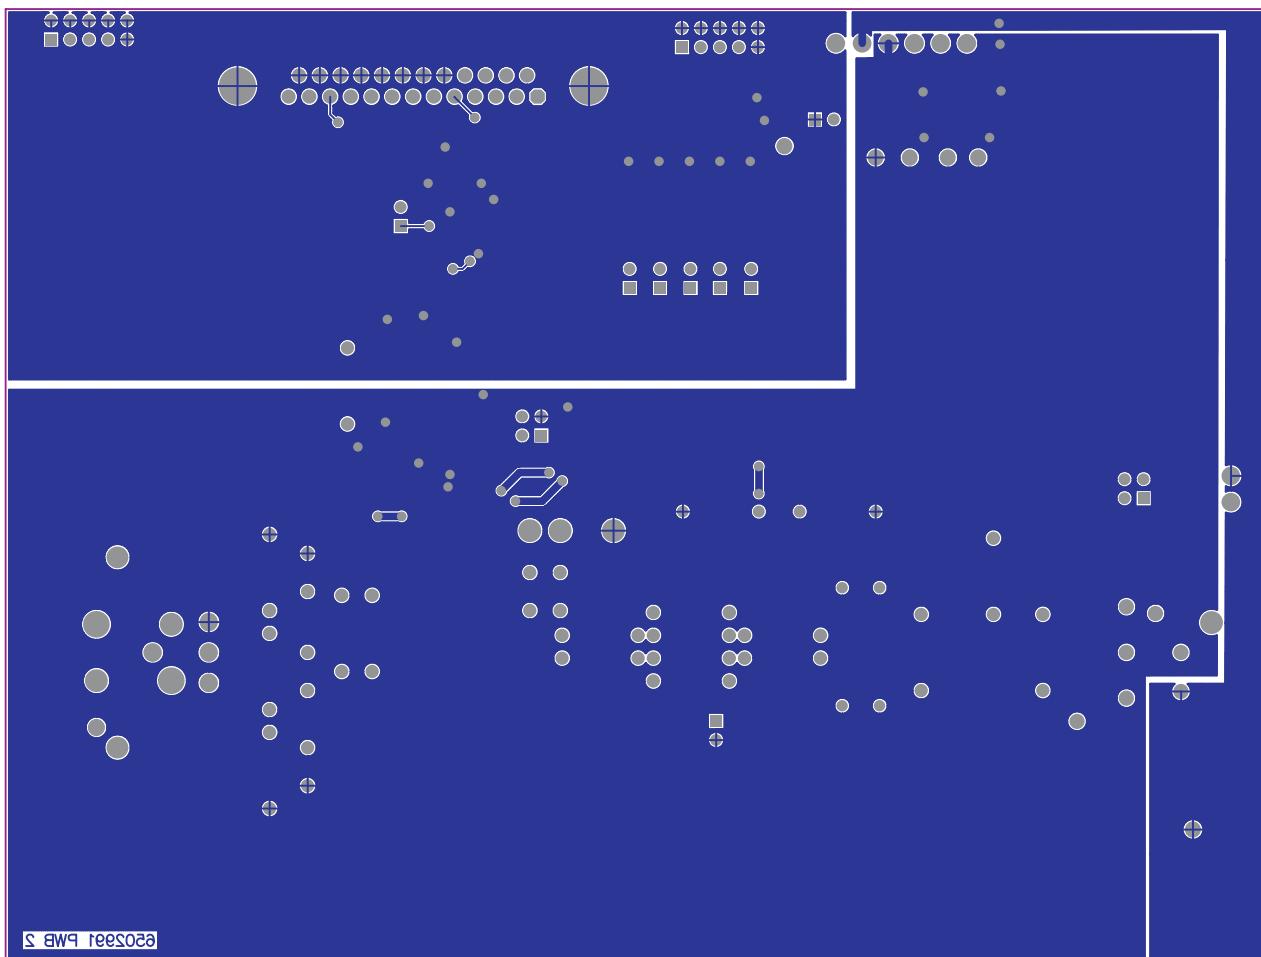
PGA2505EVM PCB Bottom Layer (Solder Side)
